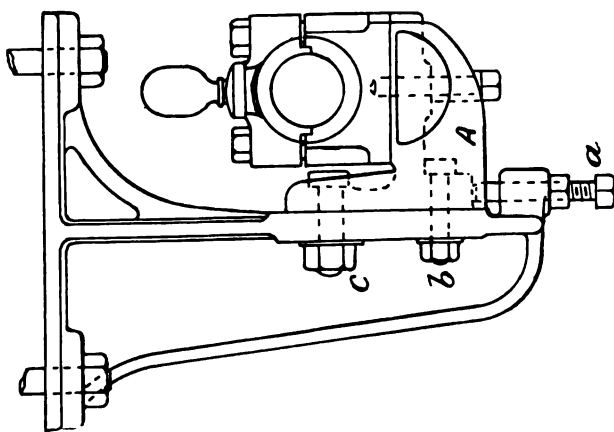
Plummer Block adjustable on Bracket A on Hang Down; a, Set Screw, b Clamping Screw; Bearing pivots round c.
